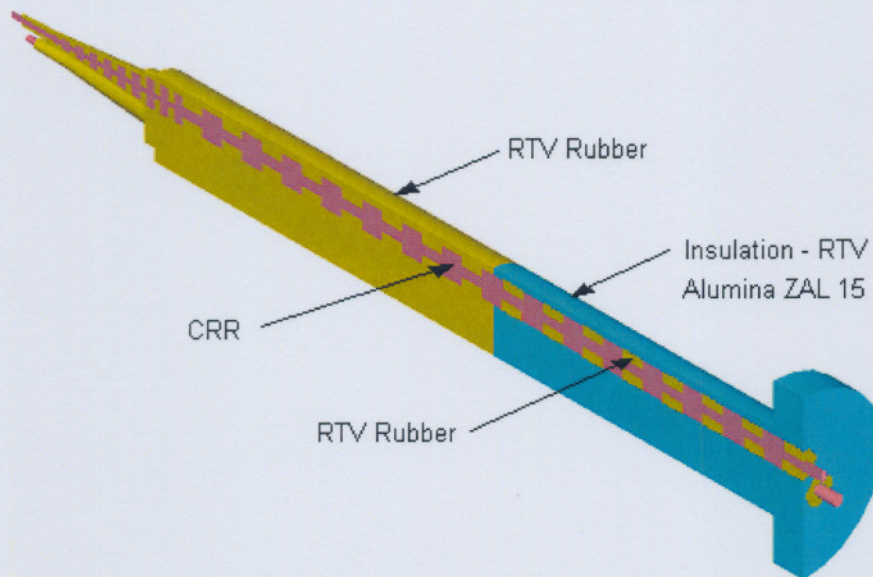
Insulation of copper ribbed rod and RTV Rubber
